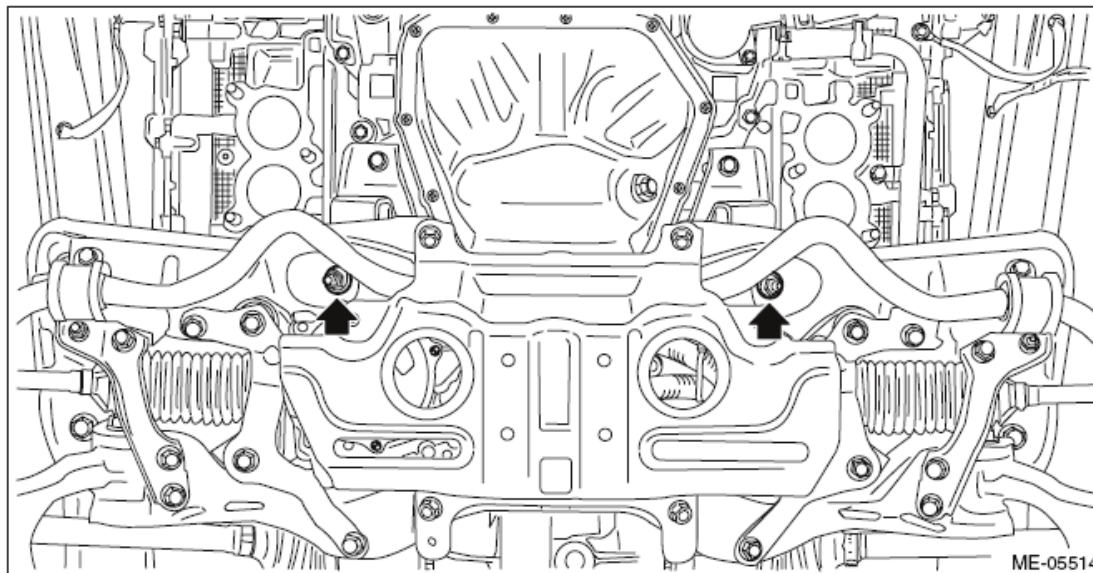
Locating Engine Mounting To Front Crossmember Nut
